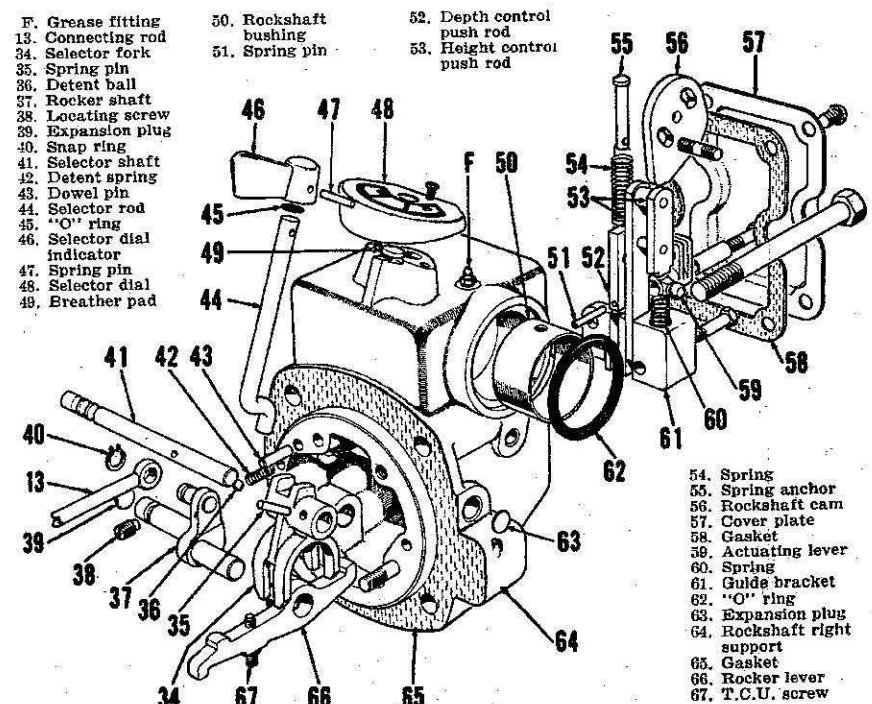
Exploded view of hydraulic system control mechanism that is mounted in rockshaft right hand support bracket (64). Note that connecting rod (13) is also shown in Fig. 204. Refer also to the assembly view in Fig. 206.
